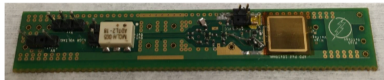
A photograph of a 1st generation PCB with a mounted mesh APD seen on the right-hand side of the PCB.
